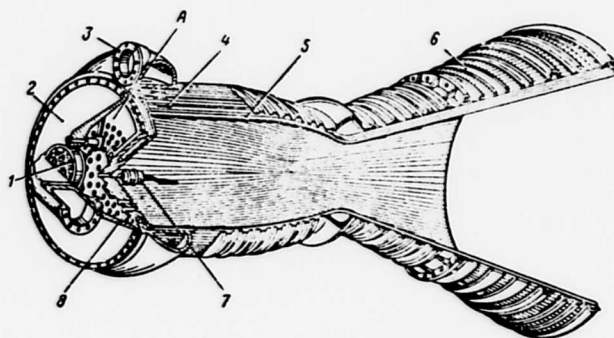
Cylindrical chamber of a liquid propellant rocket engine: A - oxidizer cavity; 1 - inlet for oxidizer; 2 - outer wall of heat; 3 - outlet for combustibles; 4 - inlet of combustibles into tubes; 5 - tubes of combustion chamber; 6 - bands; 7 - igniter; 8 - injector face.
